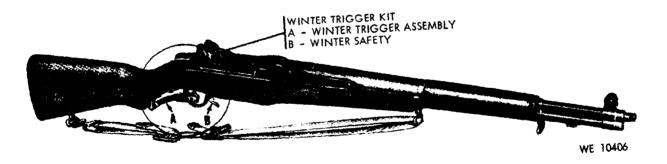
Caliber .30 rifle M1 with winter trigger kit installed - right front view.
